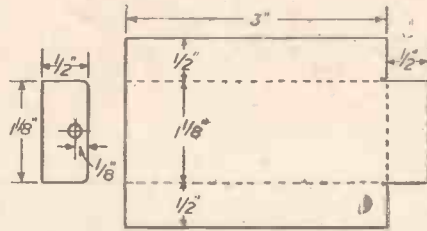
Tinplate blank for forming drip tray of lamp.
